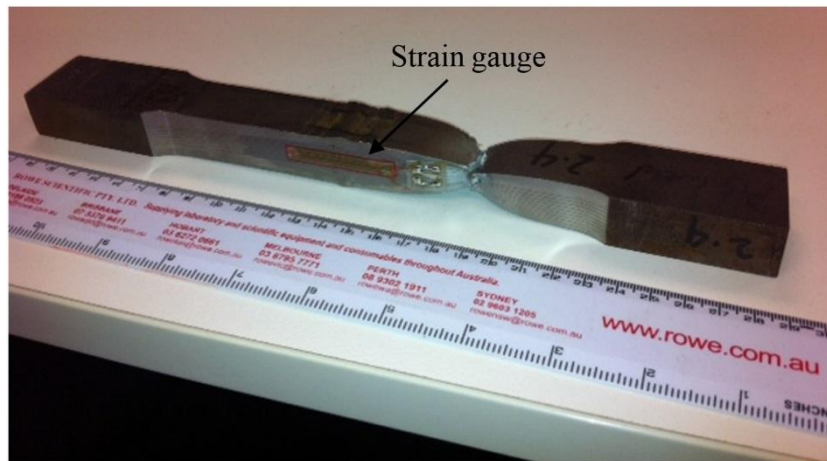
Tensile test specimens of as weld specimen showing the fracture at the parent metal
